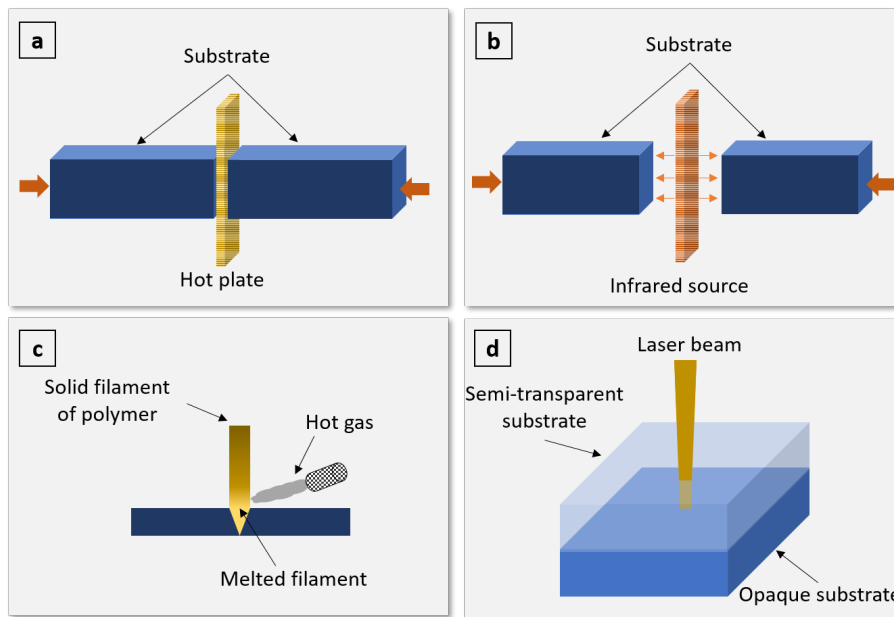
Illustration of thermal welding processes: hot plate welding (a), infrared welding (b), hot gas welding (c) and laser welding (d)
